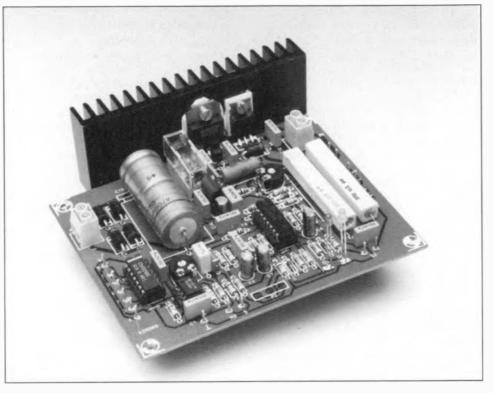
The completed printed-circuit board showing the position of the heat sink.
